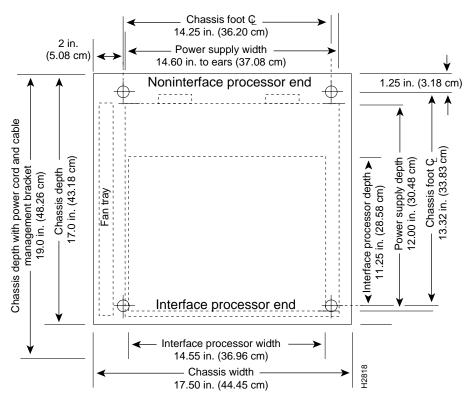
Chassis Footprint and Outer Dimensions (Cisco 7505)
